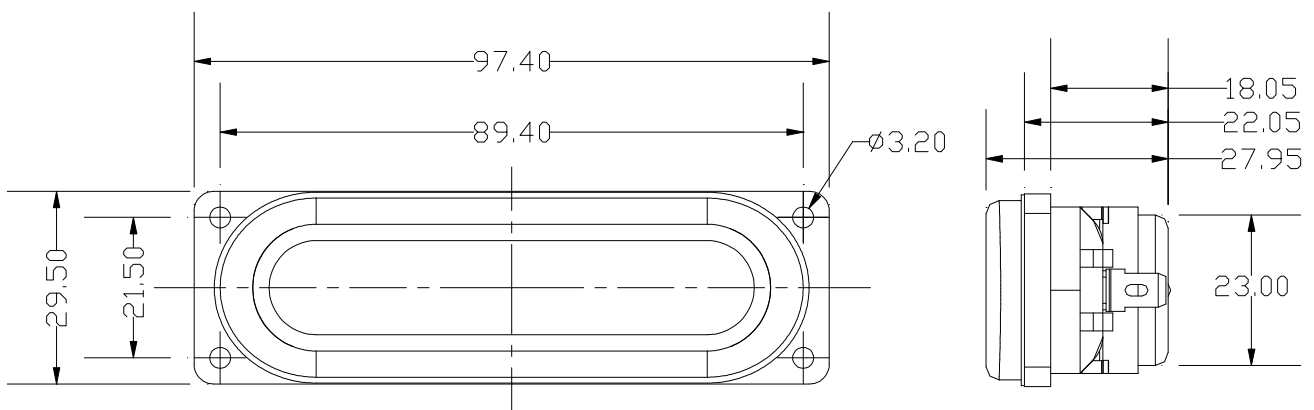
Nominal dimensions. Mounting gasket (thickness 1.8mm) not shown.
